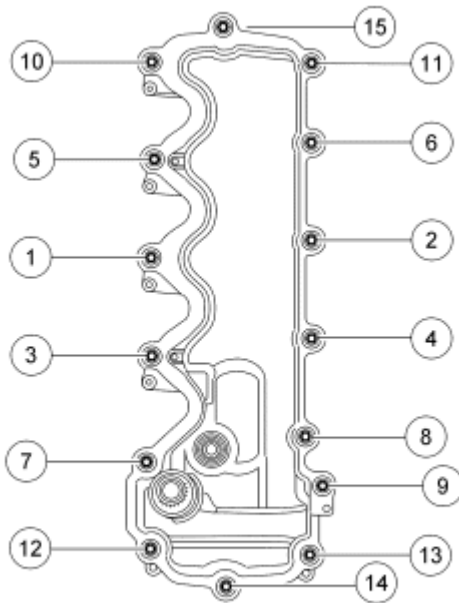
Identifying Tighten Sequence Of Valve Cover Bolts
